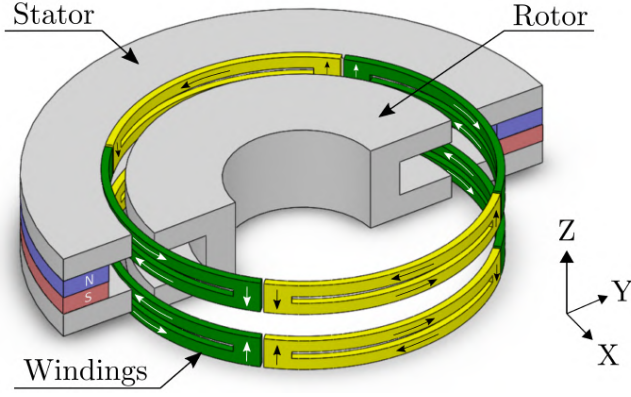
3D cross-sectional view of the SHH-AMB with rotor saliencies.
